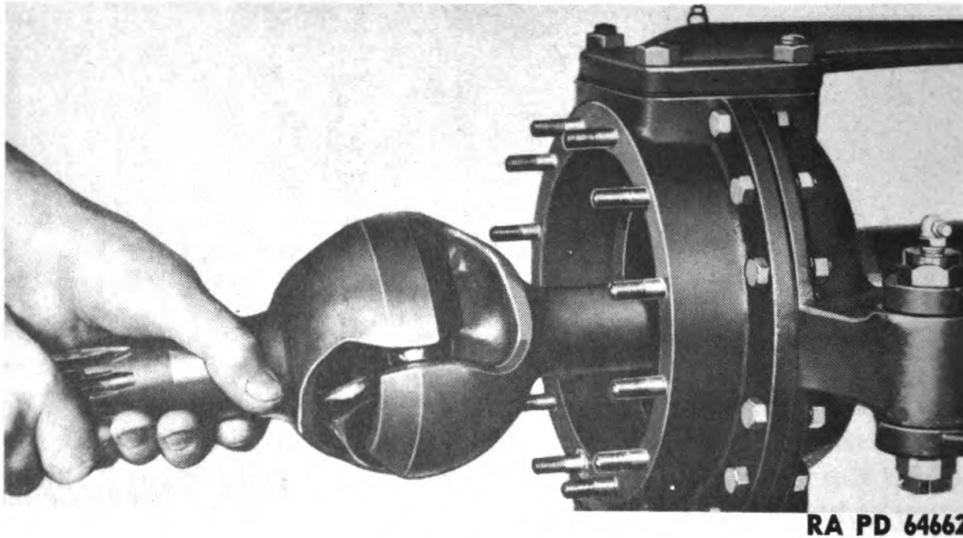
Removing Axle Shaft and Universal Joint Assembly
